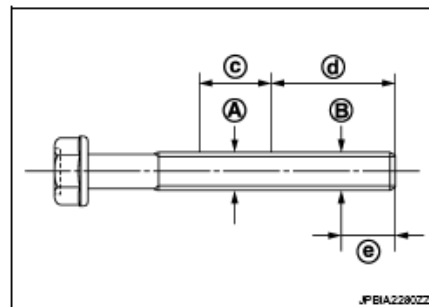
Identifying Main Bearing Cap Sub Bolt Outer Diameter
